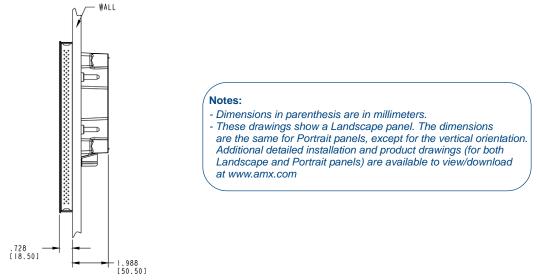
MXD-2001-PAN-L Installation Dimensions (side view)
